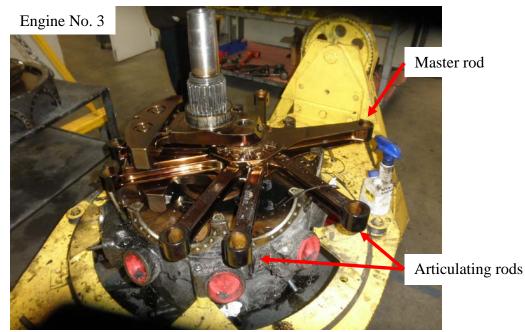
View of the crankshaft showing it and the master rod were intact with the counterweights and all of the articulating rods were in place and undamaged.
